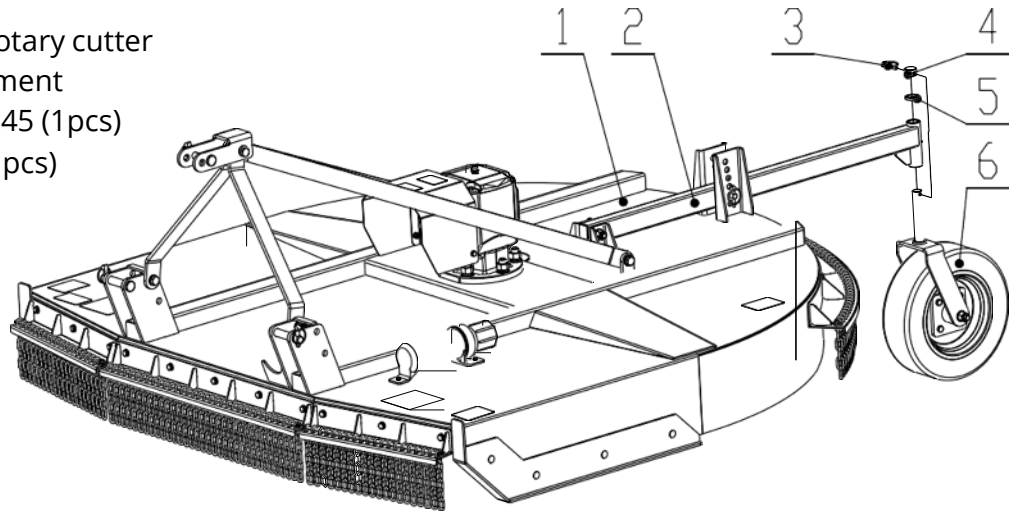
Installing Wheel Tire Assembly and Fittings
